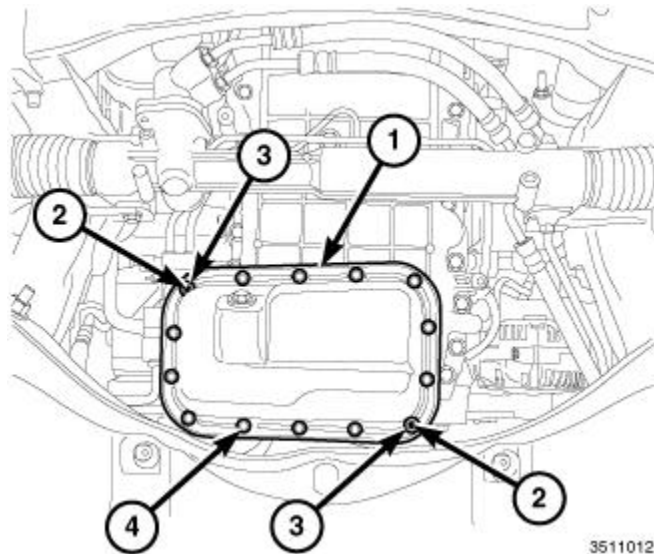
Bolts, Studs, Nuts & Lower Oil Pan
